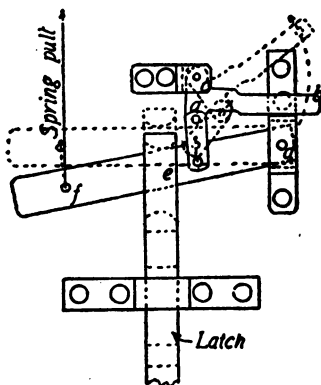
Portion of Steam Shovel Dipper Door Showing Arrangement of Spring Latch.
